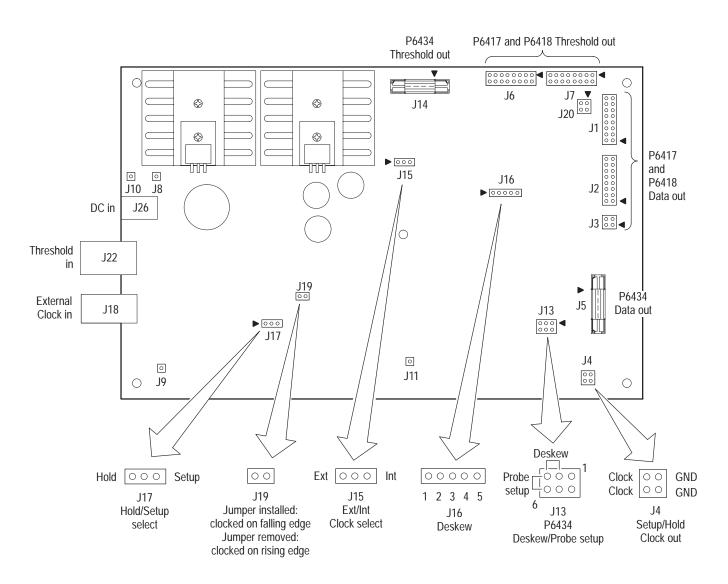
Adjustment/verification fixture connections and jumper locations
